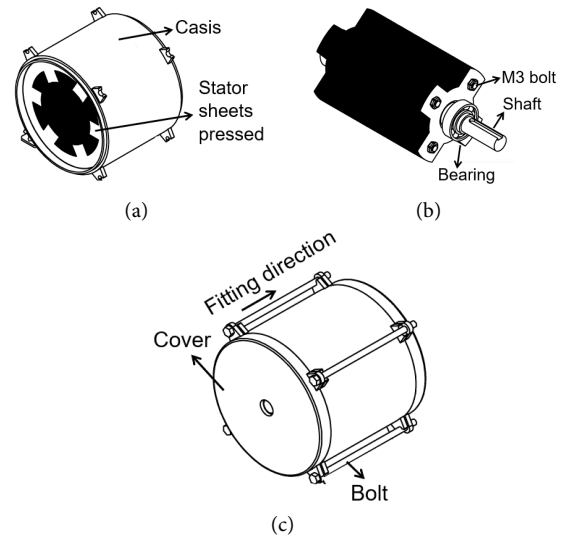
(a) Manufacturing drawing of stator; (b) rotor; (c) overall SR motor.
